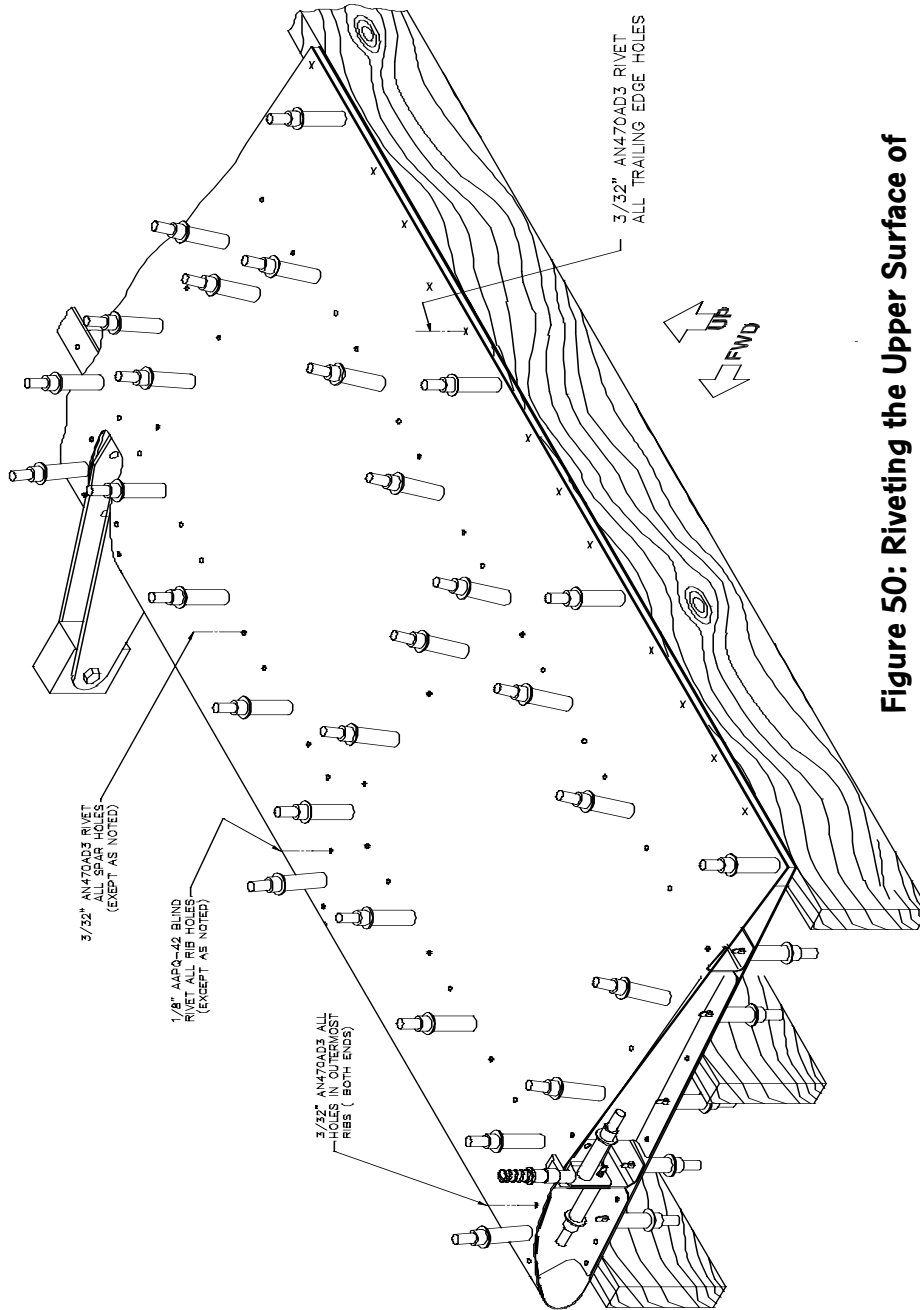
Riveting the Upper Surface of the Skin to the Spar/Rib Assembly
